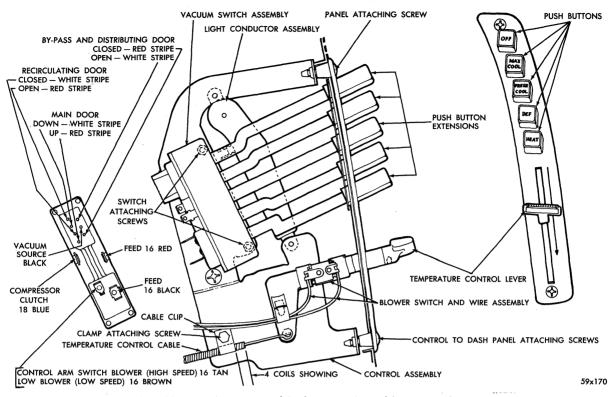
Vacuum Actuator and Push Button Assembly (Imperial) (Schematic)
